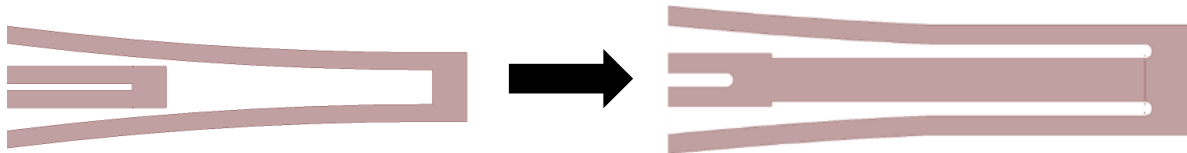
Sketch of an early spring design that often cracked when retracted by starch. Two design modifications prevented that: A structure was added that allows the spring arms to roll down on, close to the edges, and all corners were rounded.
